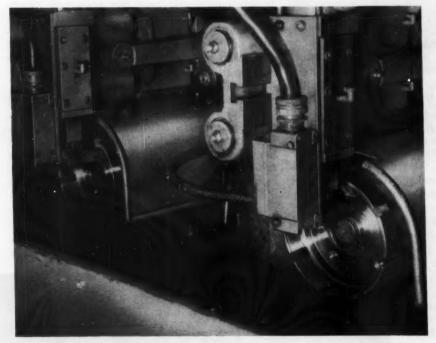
Close-up view of one of the two spindles on the machine shown in Fig. 3 shows how the stone is mounted on an offset holder so that it can be reciprocated at rates up to 800 strokes per minute.
